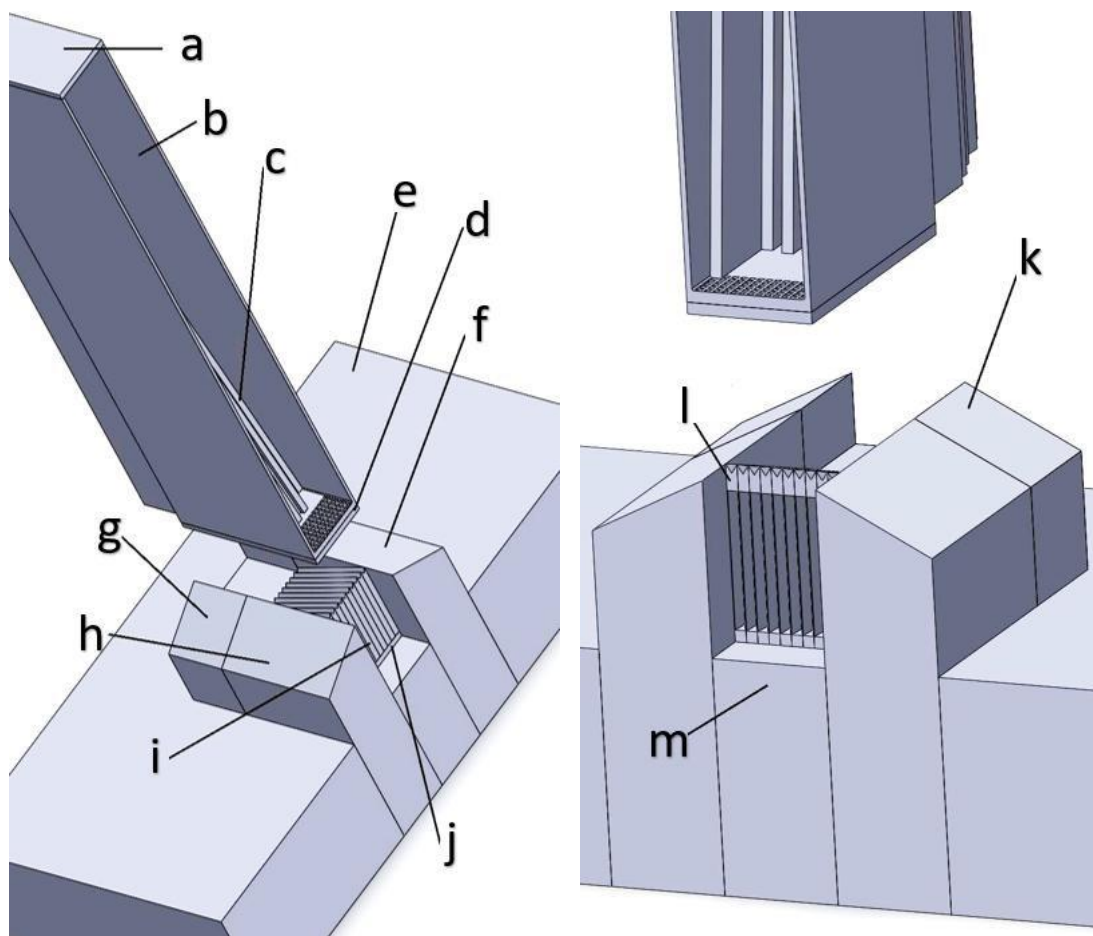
Left and right hand-side section views of the 3D CAD (SolidWorks™) drawings of the multi-material powder deposition system assembly.
